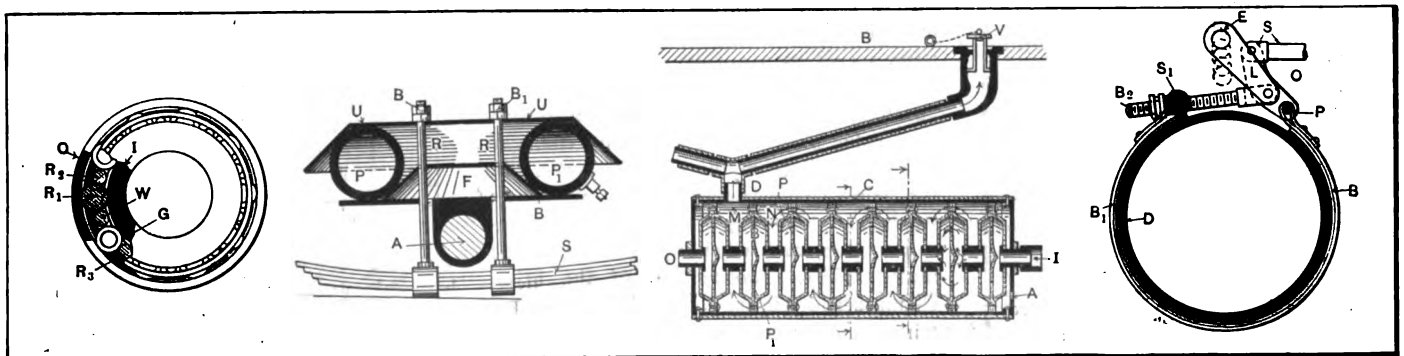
Upton Bearing. Fig. 2—Bancroft Shock Cushion. Fig. 3—Lewis Heater. Fig. 4—Lincoln Brake
